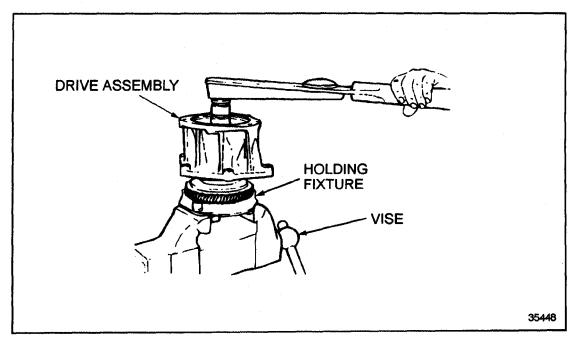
Air Compressor/Raw Water Pump Drive Hub Disassembly
